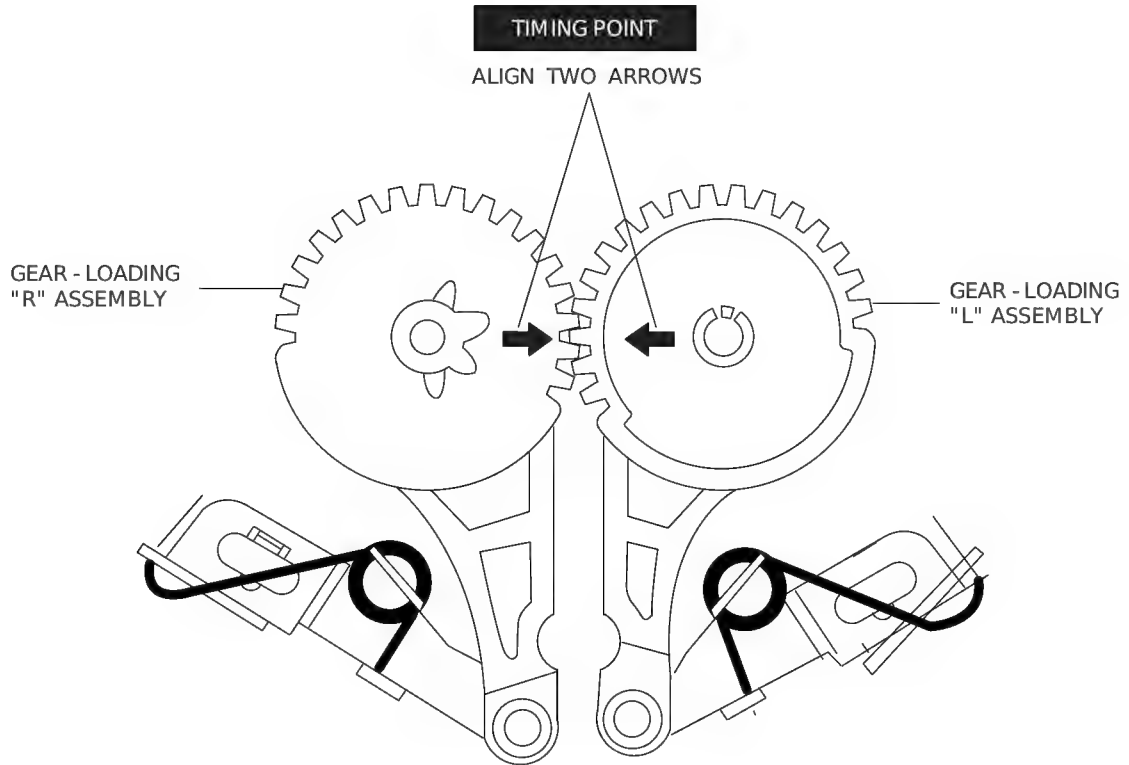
Assembly of Gear Loading "L", "R" Ass'y
